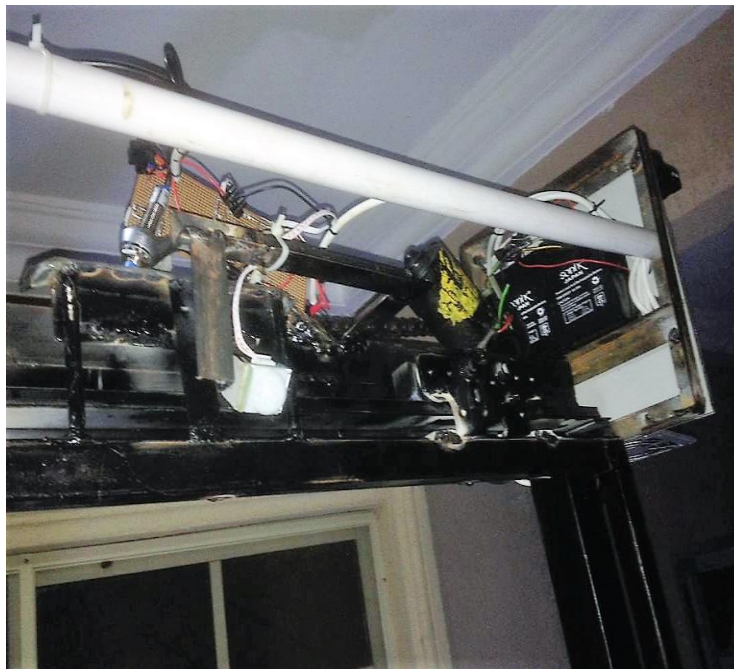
A pictorial view of the installed sprockets, chain, and motor
